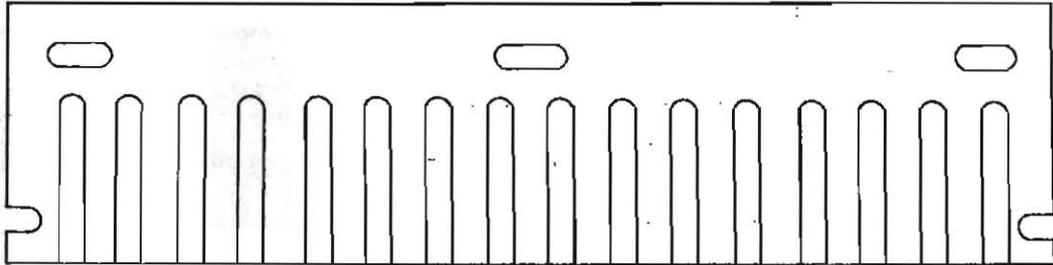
The position of holes for securing the cutter blades to the rotor disc to allow lateral movement.
